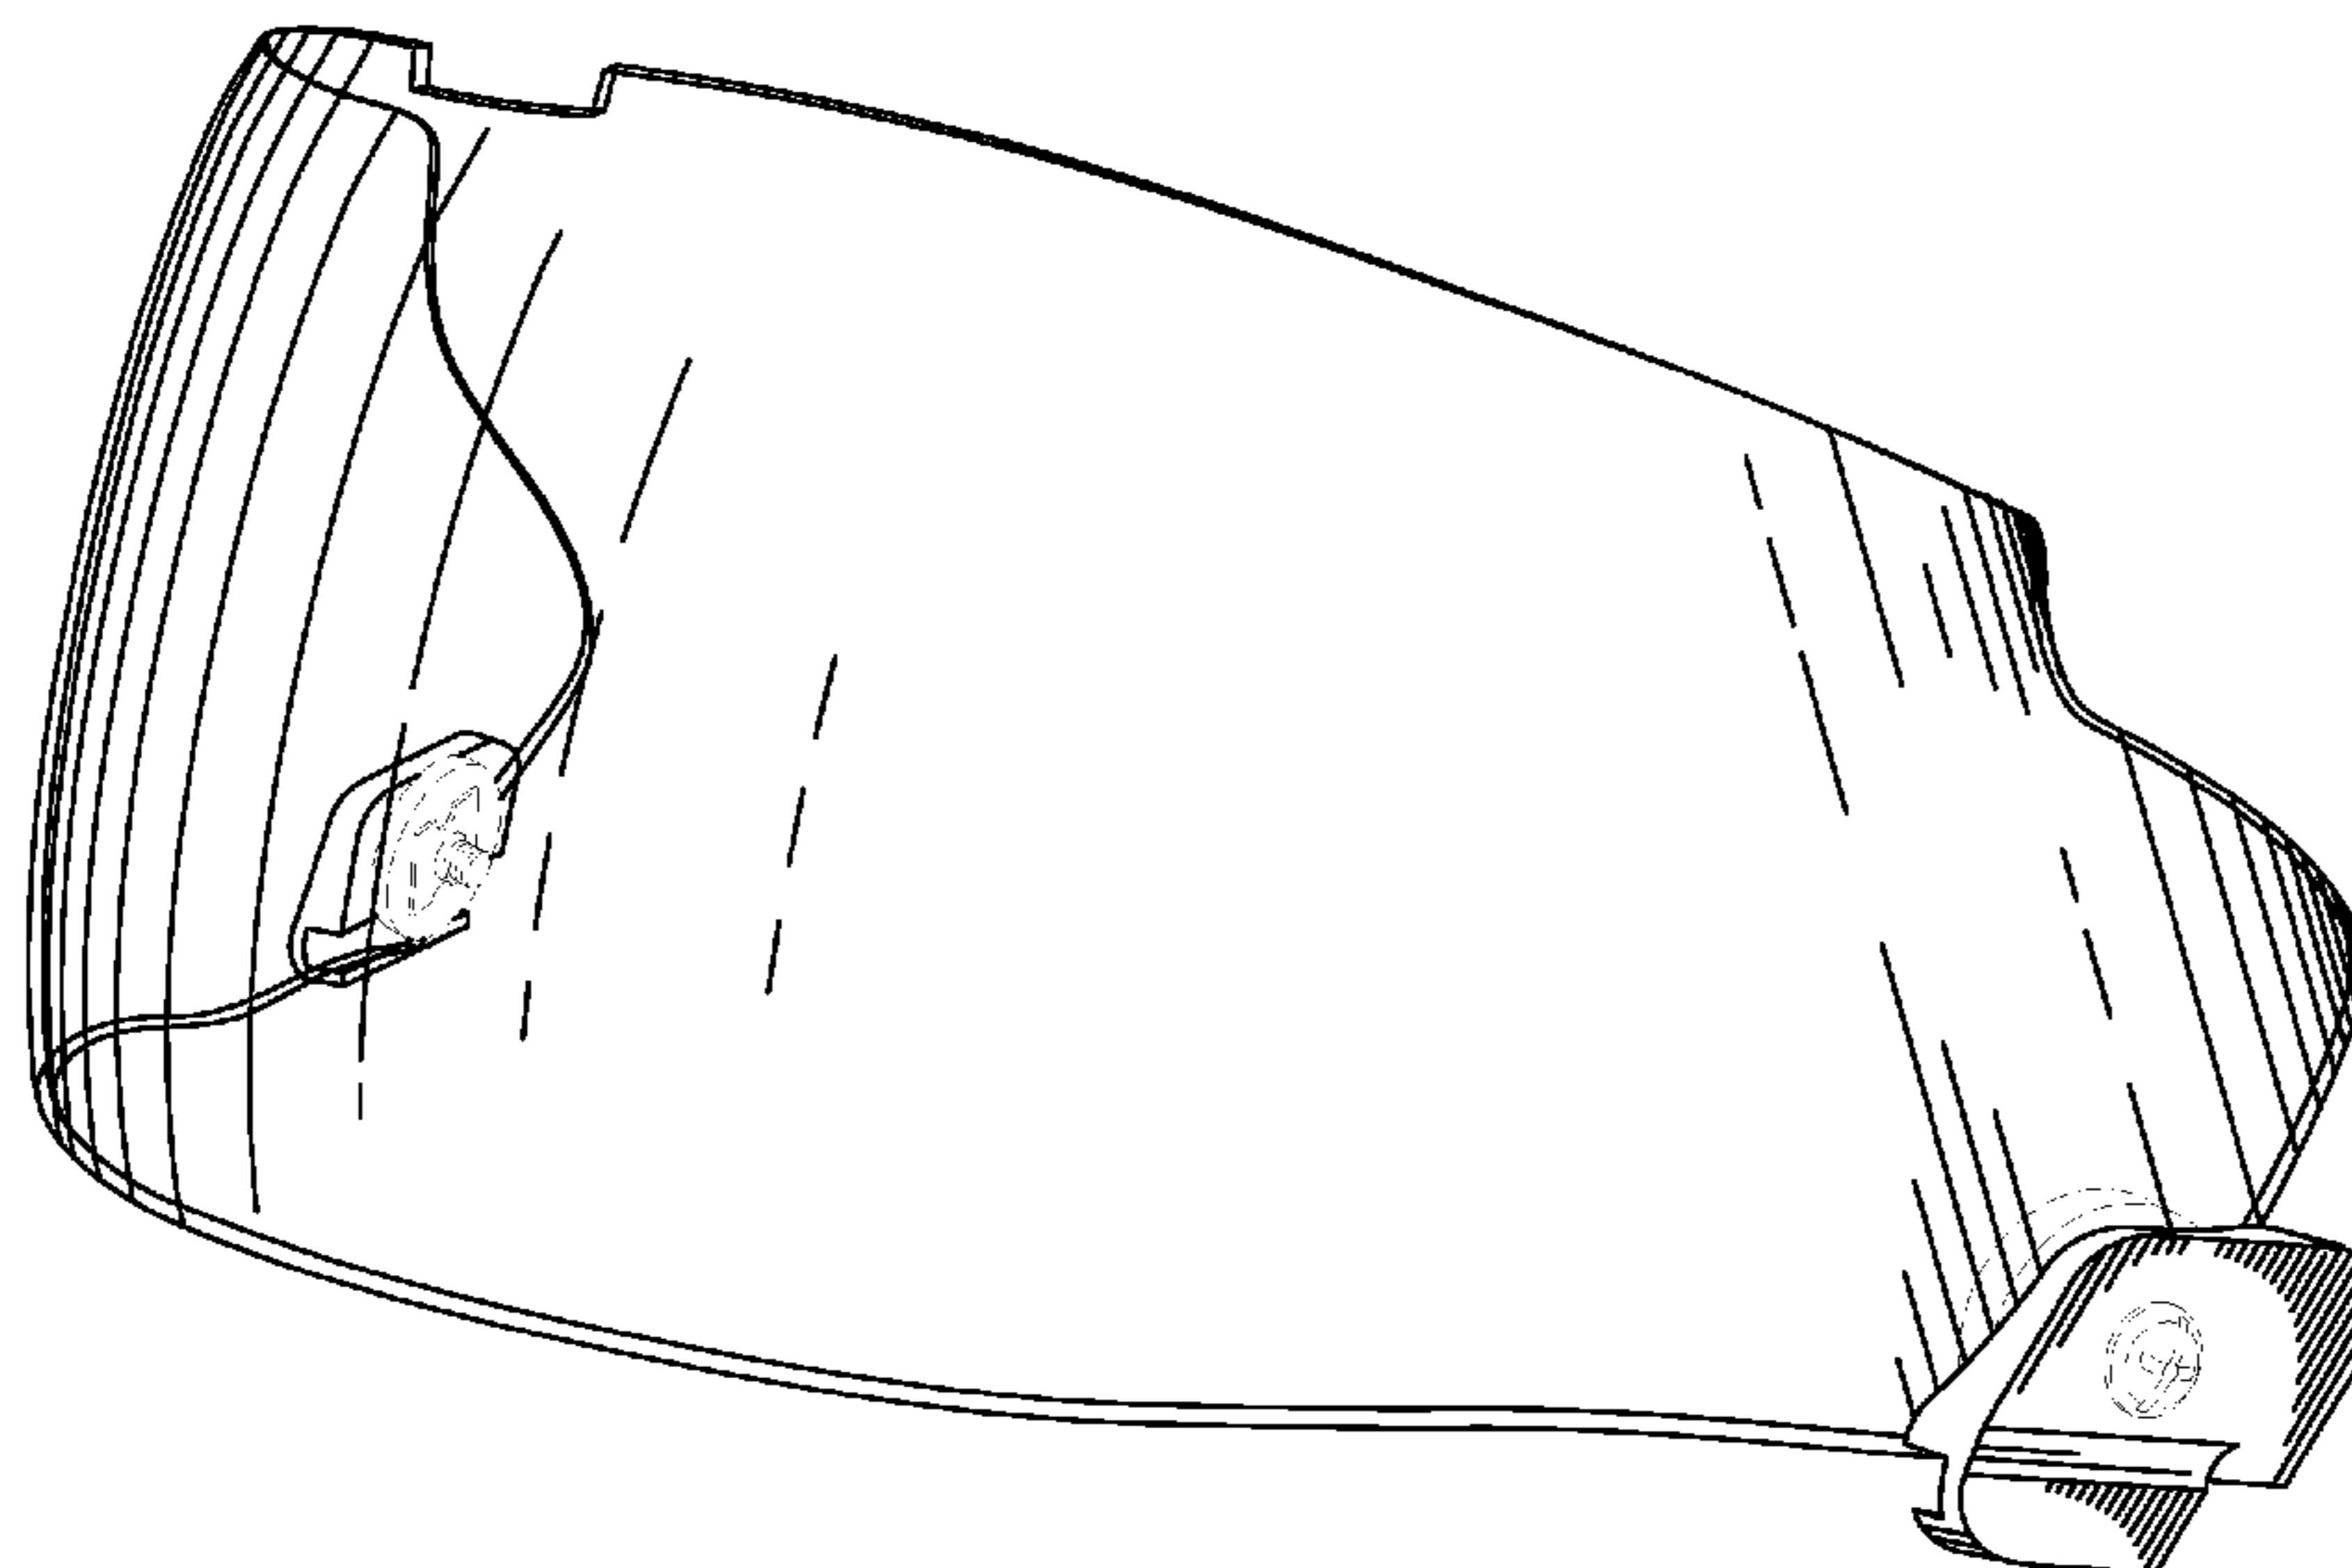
is a right side elevational view of the lacrosse helmet visor of FIG. 1.
